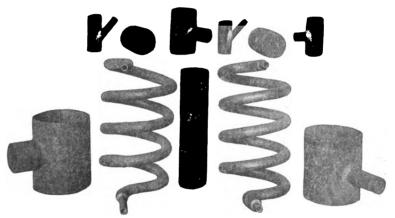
Miscellaneous Pipe Welds with Light Tubing Courtesy of C. & C. Electric and Manufacturing Company
